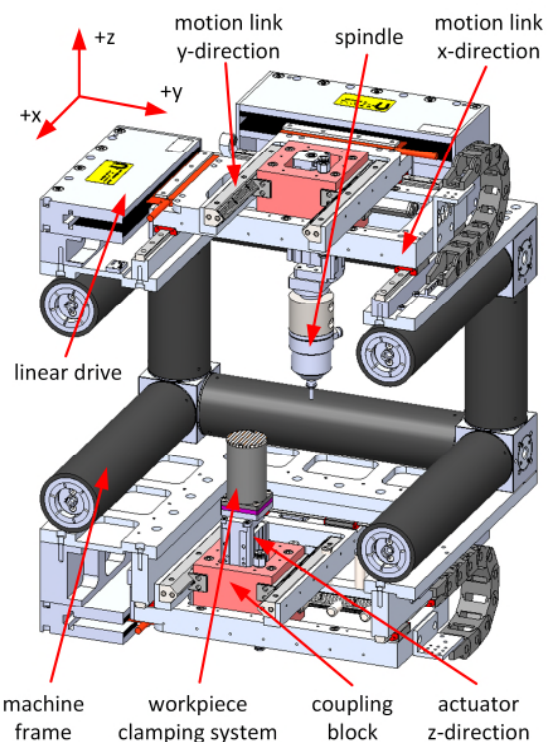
Improved design concept of a size-adjusted machine tool in milling configuration.
